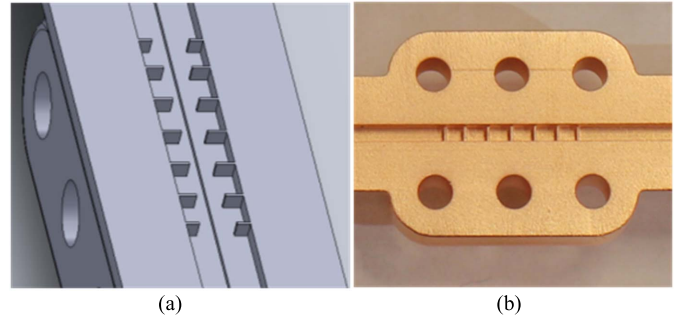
W-band sixth-order filter. (a) CAD layout showing a horizontal cross section through both parts of the assembled split block. (b) Photograph of a single manufactured split-block part showing the vertical cross section.
